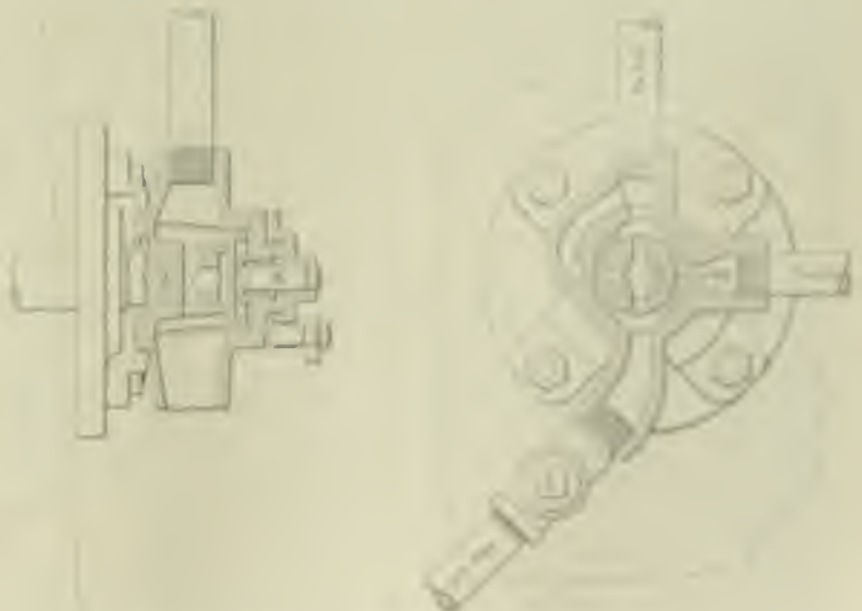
INTERNAL VIEW OF THE CARBURETOR.
